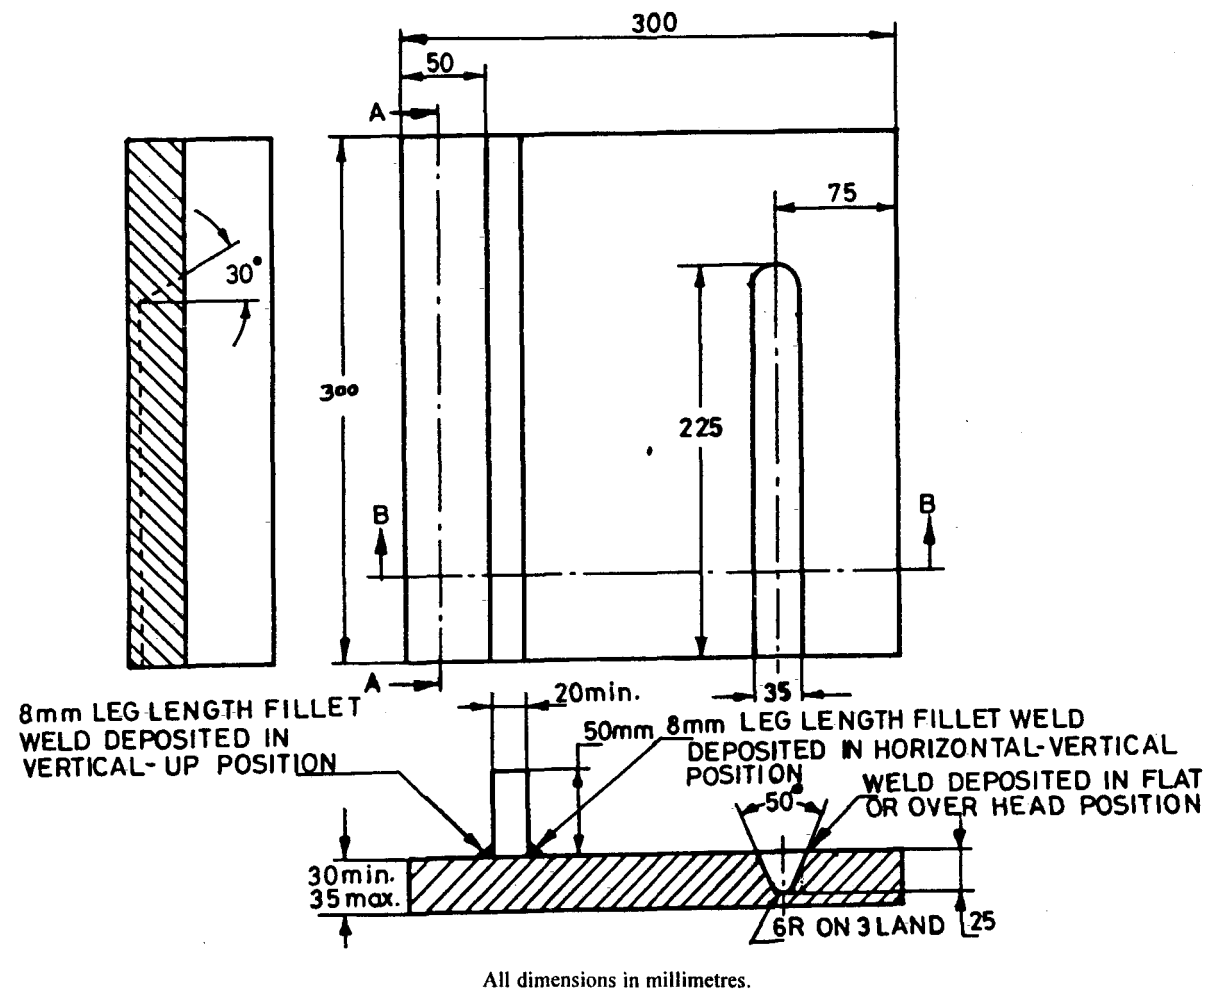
TEST PIECE FOR THE APPROVAL OF WELDERS
